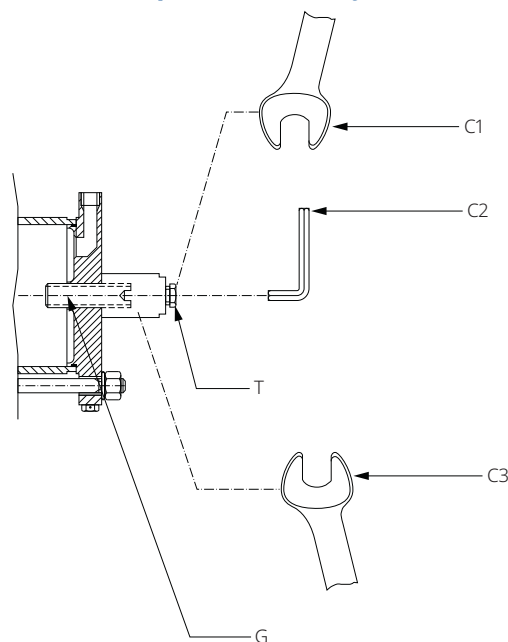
Mechanical Stop at the End Flange of Manual Override (3)
